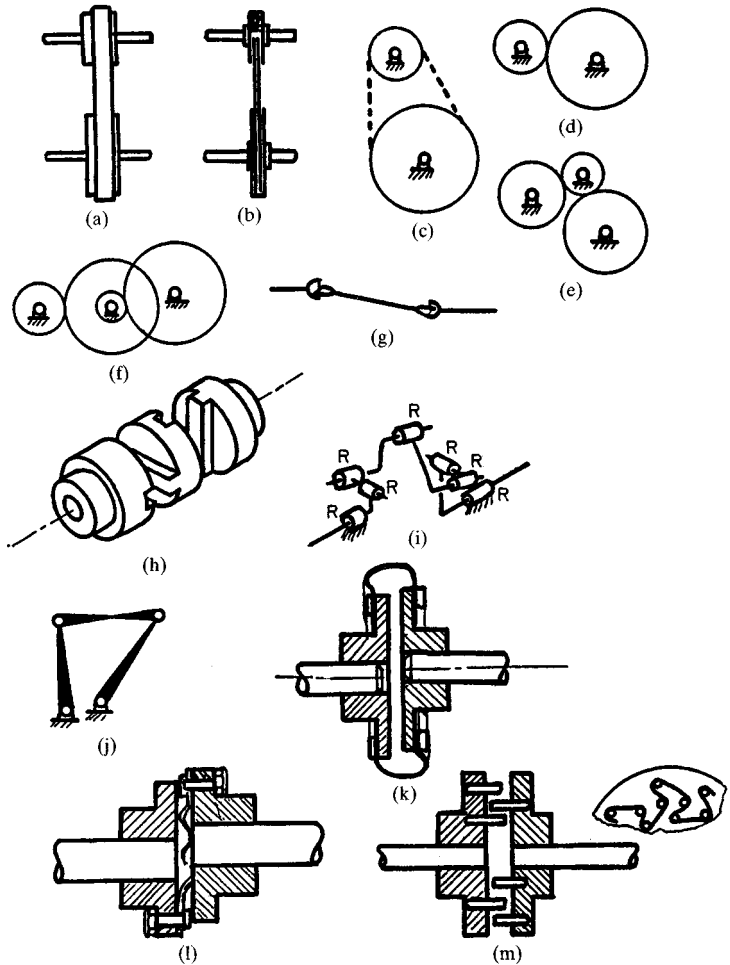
Couplings and connectors—parallel shafts. (a) Flat belt; (b) V belt; (c) chain; (d) to (f) gears; (g) Hooke joints; (h) Oldham coupling; (i) Hunt's constant-velocity coupling; (j) drag link; (k) to (m) flexible coupling.
